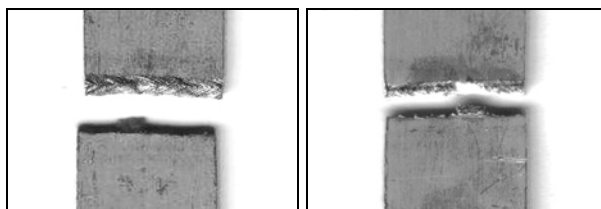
CRACK SURFACES FROM TENSILE TESTS: (LEFT) TOP-SIDE, (RIGHT) BACK-SIDE
